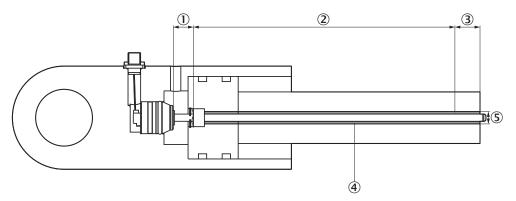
Encoder installed in the hydraulic cylinder – MAX30
